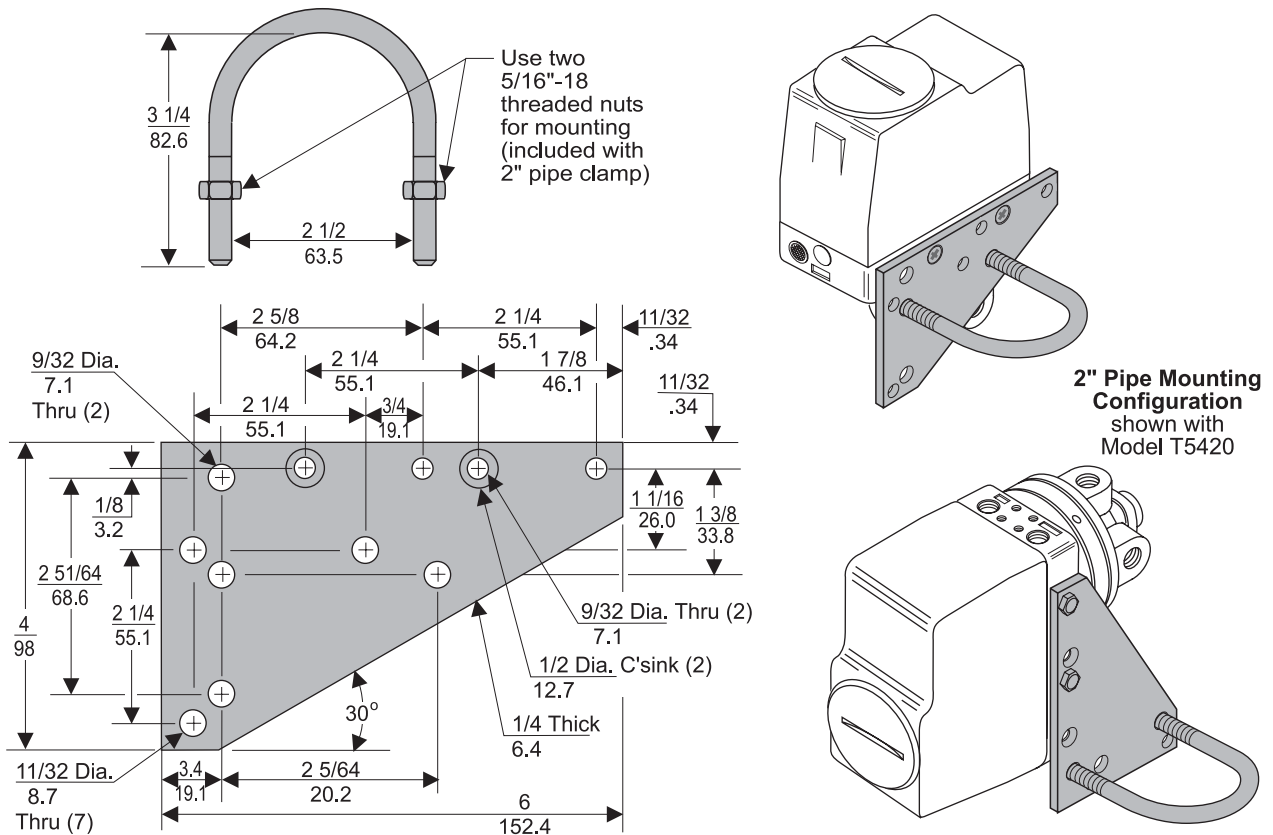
Optional Mounting Kit 14596. (Sold Separately)
